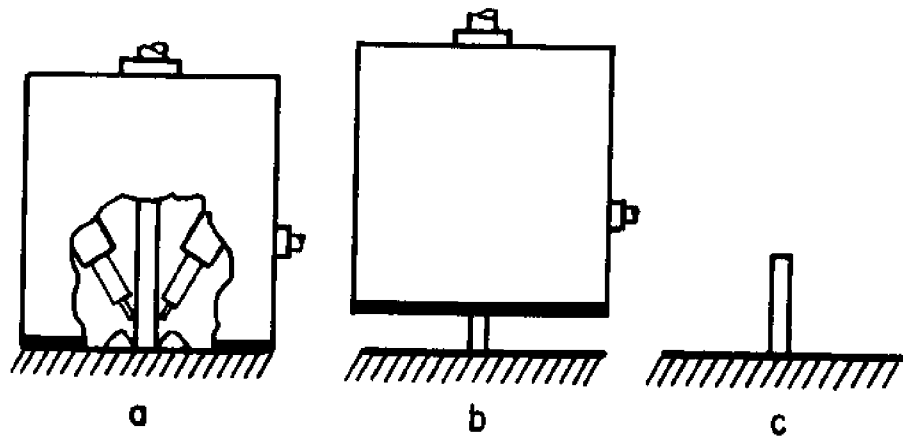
Welding procedure sequence of automatic underwater welding machine.
